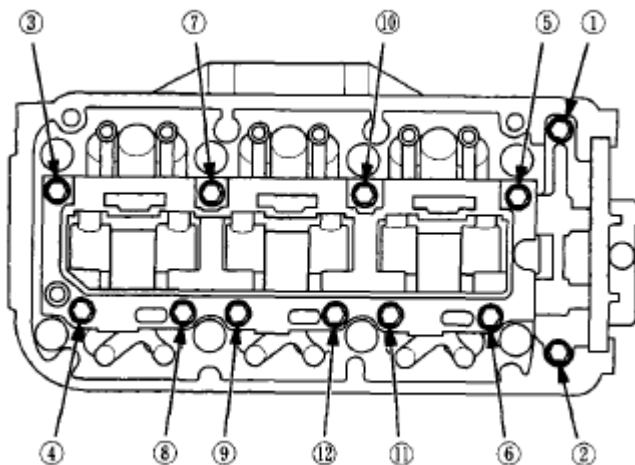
Identifying Rocker Shaft Bridge Mounting Bolts And Rocker Shaft Holder Mounting Bolts Tightening Sequence
